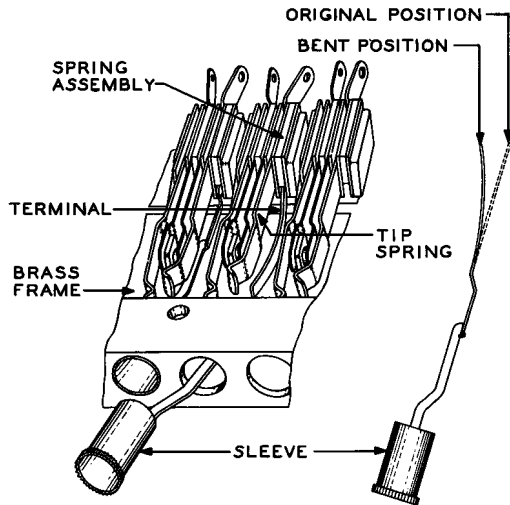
Method of Inserting Sleeve Into the 141 Jack
